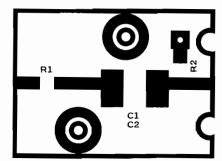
(a) A1-A1 Dc Block PC Board Parts Layout (MS2601A) 3
